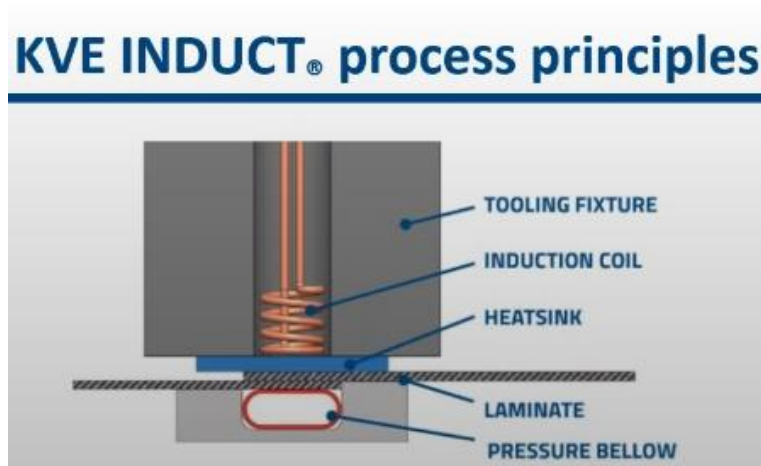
KVE INDUCT® induction welding process.
